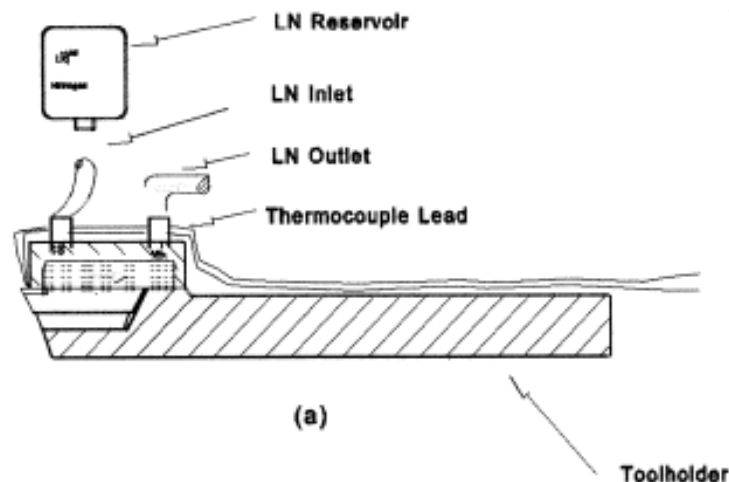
Assembly with tool cap for cryogenic cooling (Wang and Rajurkar, 2000)
